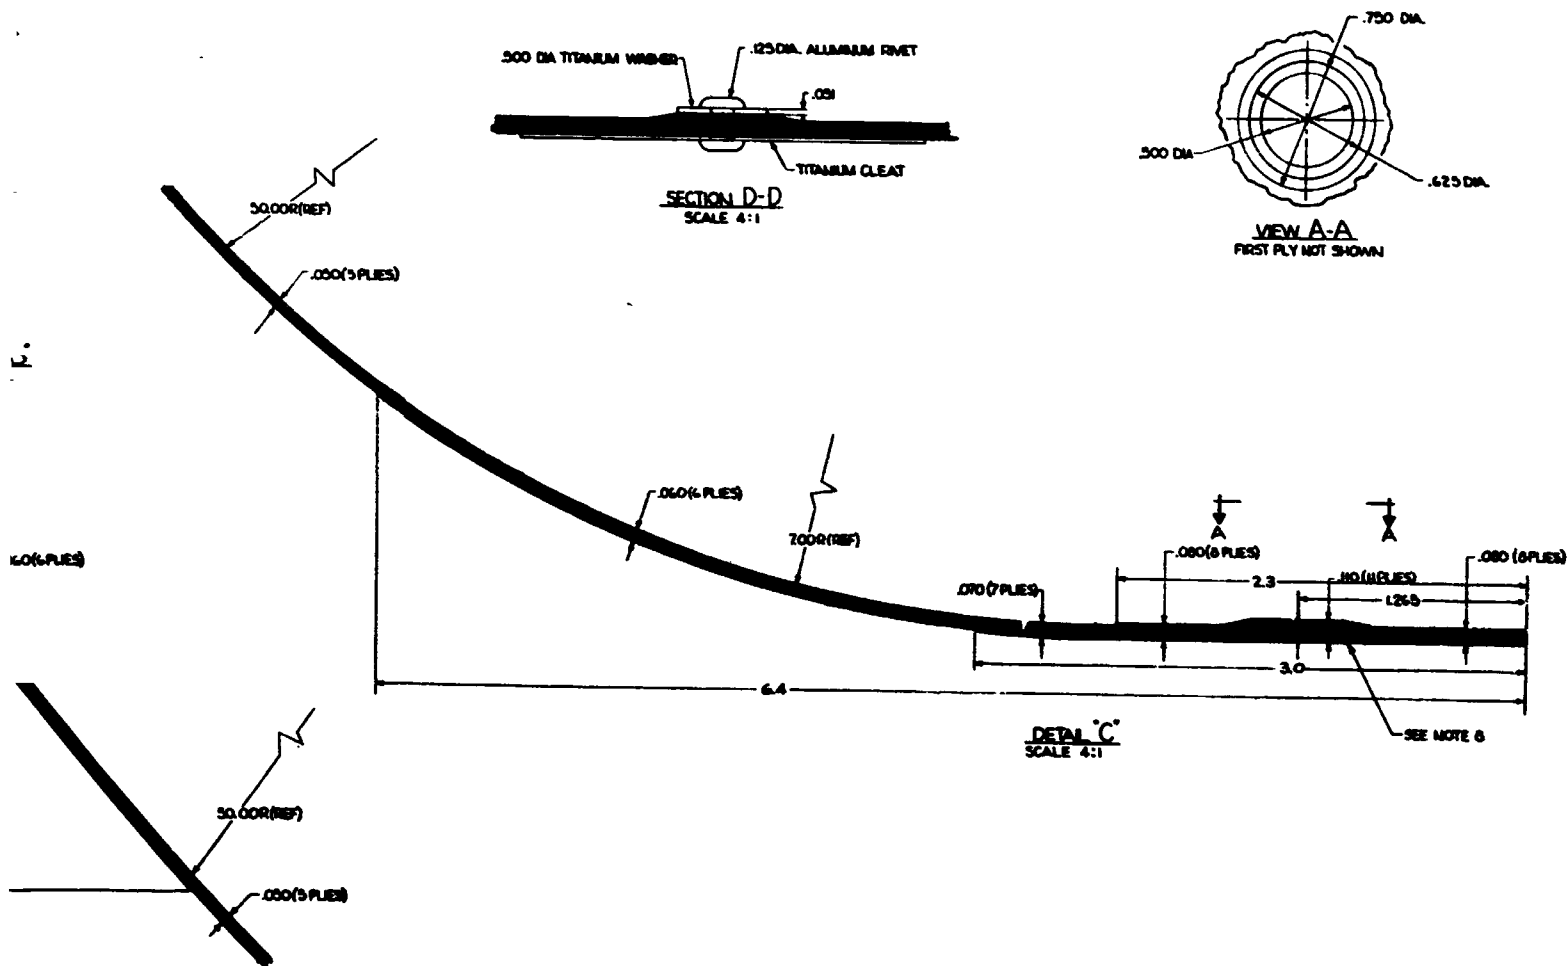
DLV WHEEL ASSEMBLY
